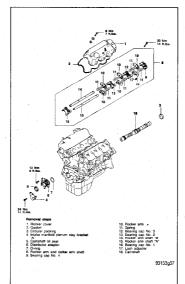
Camshaft, rocker arm and shaft assemblies—3.0L SOHC engine
